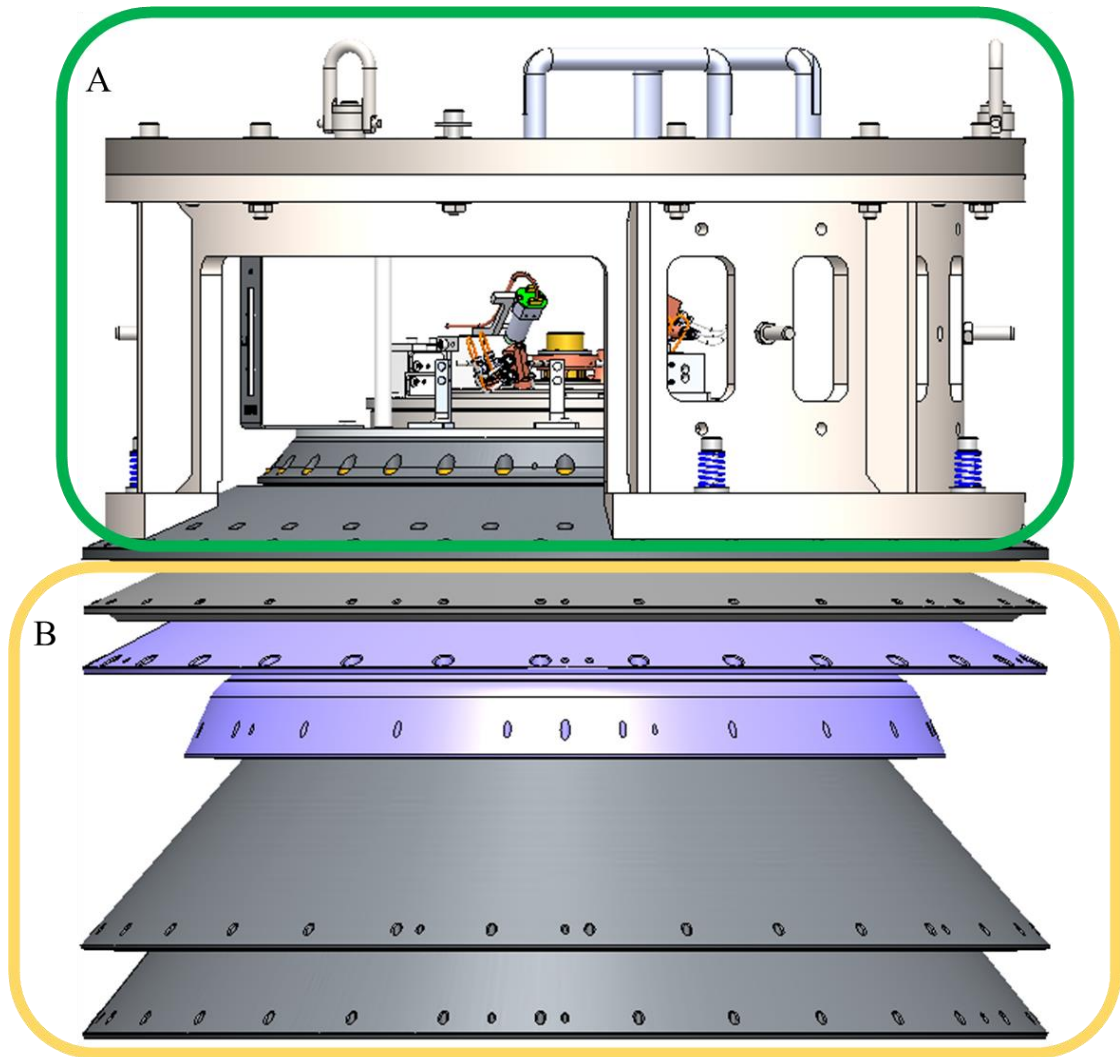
Example of the load hardware that is installed in the Z center section. The green boxed upper section (part A) shows the blast shield over the load and diagnostic instruments. The yellow boxed lower section (part B) shows the magnetically insulated transmission lines (MITLs) that provide current to the load.
